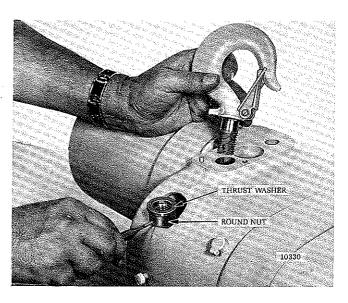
Removing Upper Hook and Hook Nut From Hoist Frame (1/4 thru 1 ton models)
